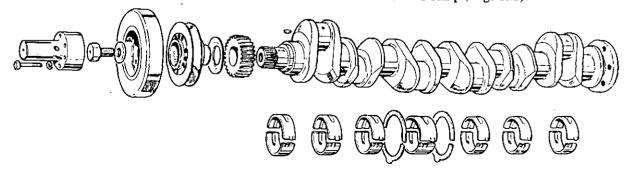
Exploded view of Crankshaft and Main Bearings.
